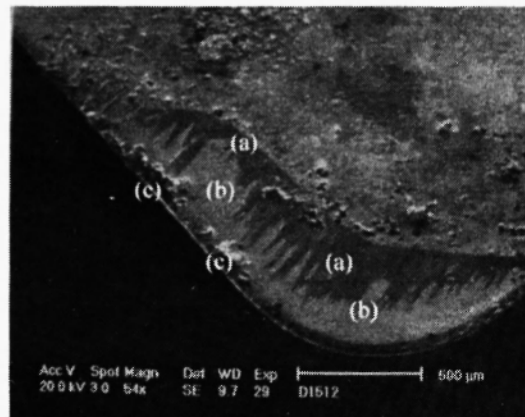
Crater wear on rake face: Tool 2 (60 m/min)
